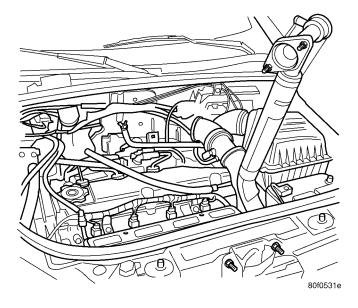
HOSE AND HOUSING ROTATED - 2.4L TURBO
